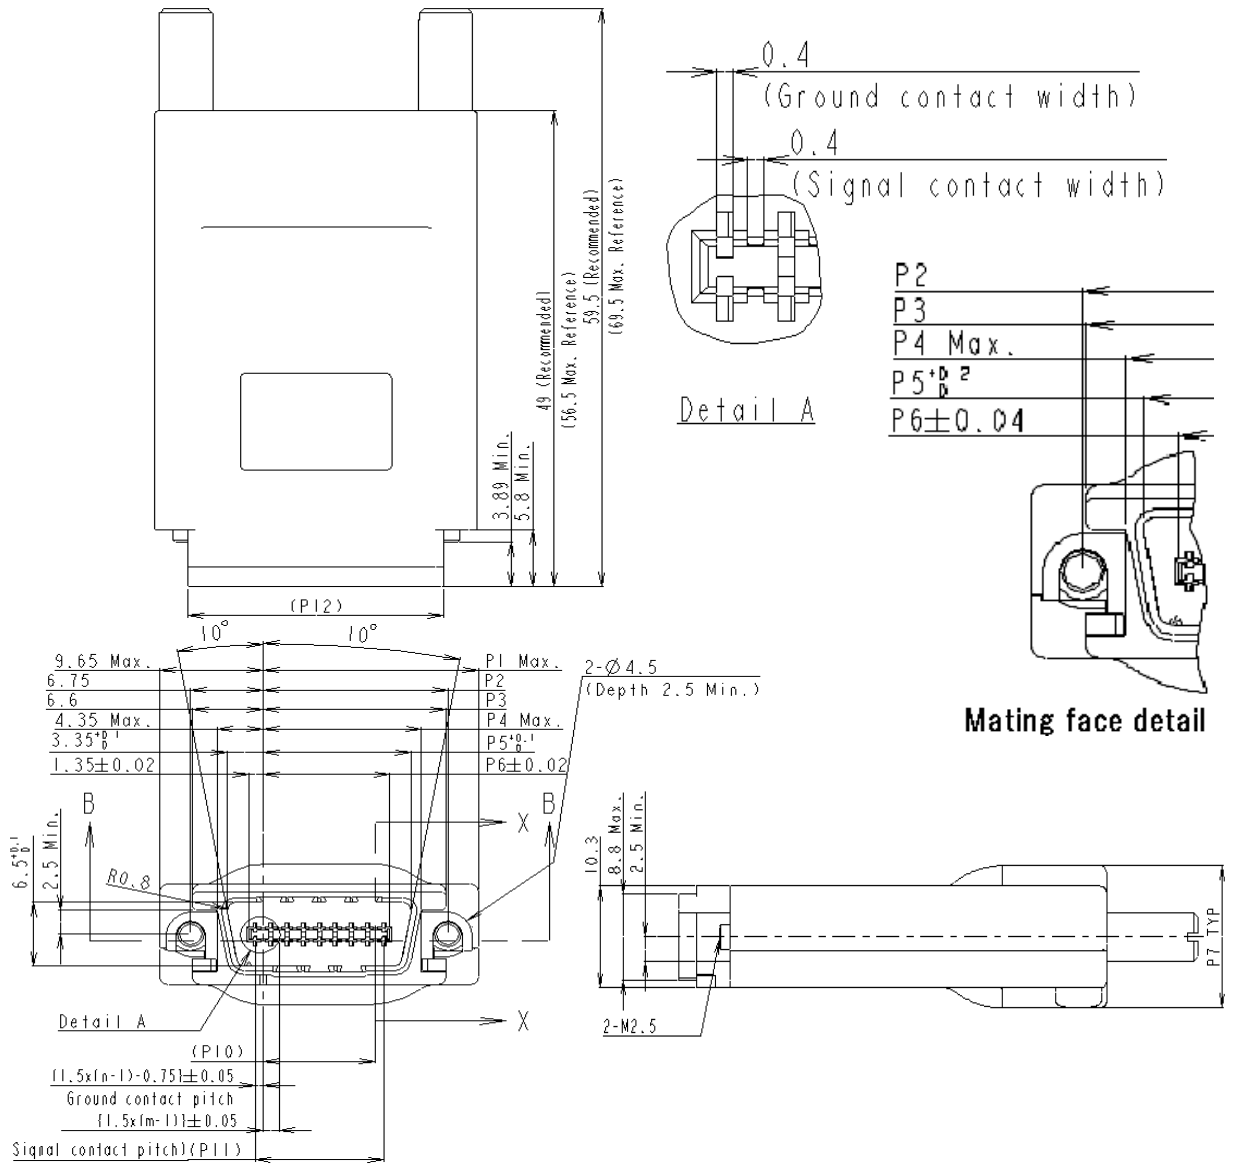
Jack Screw Plug Dimensions (Without Key Slot)
